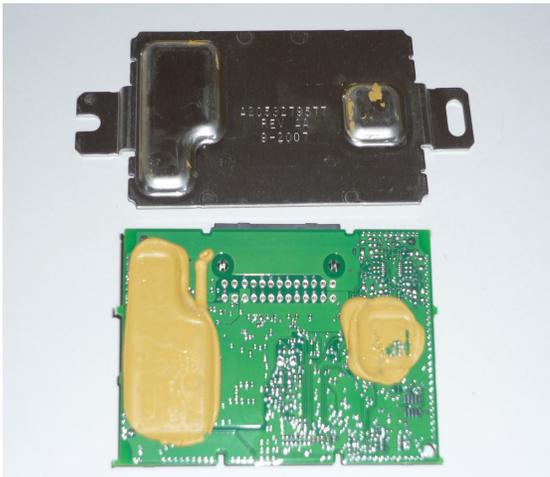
Continental Transfer Case Controller Module Showing Thermal Adhesive Used to Attach PC Board to Aluminum Back Plane
